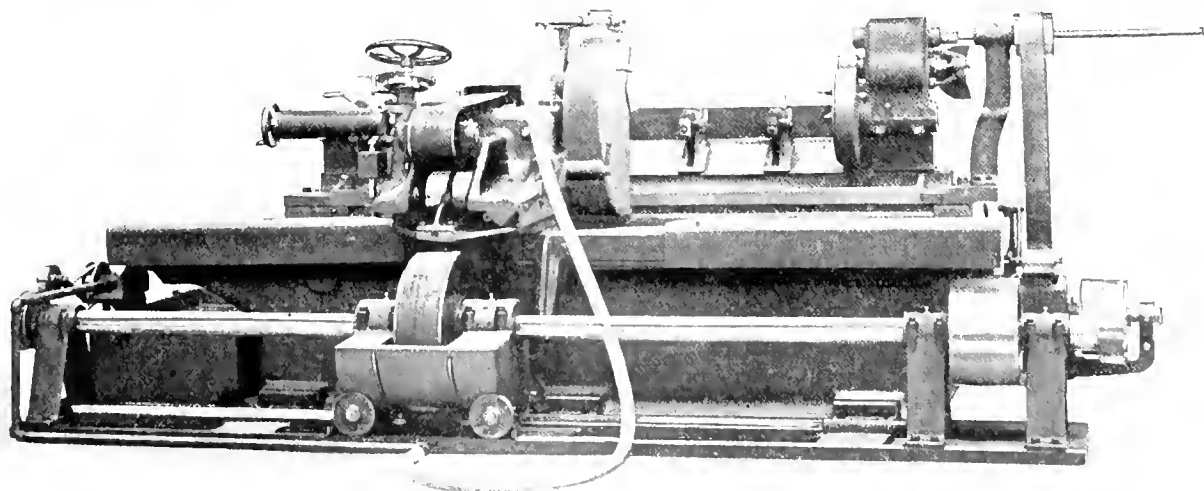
Rear View of Landis Grinding Machine, showing Self-contained Drive
